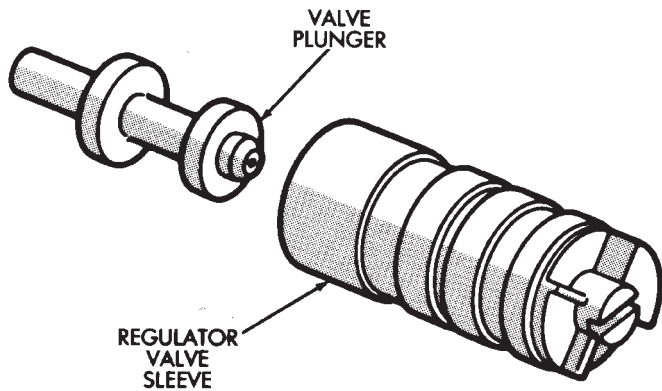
Removing/Installing Primary Pressure Regulator Valve
